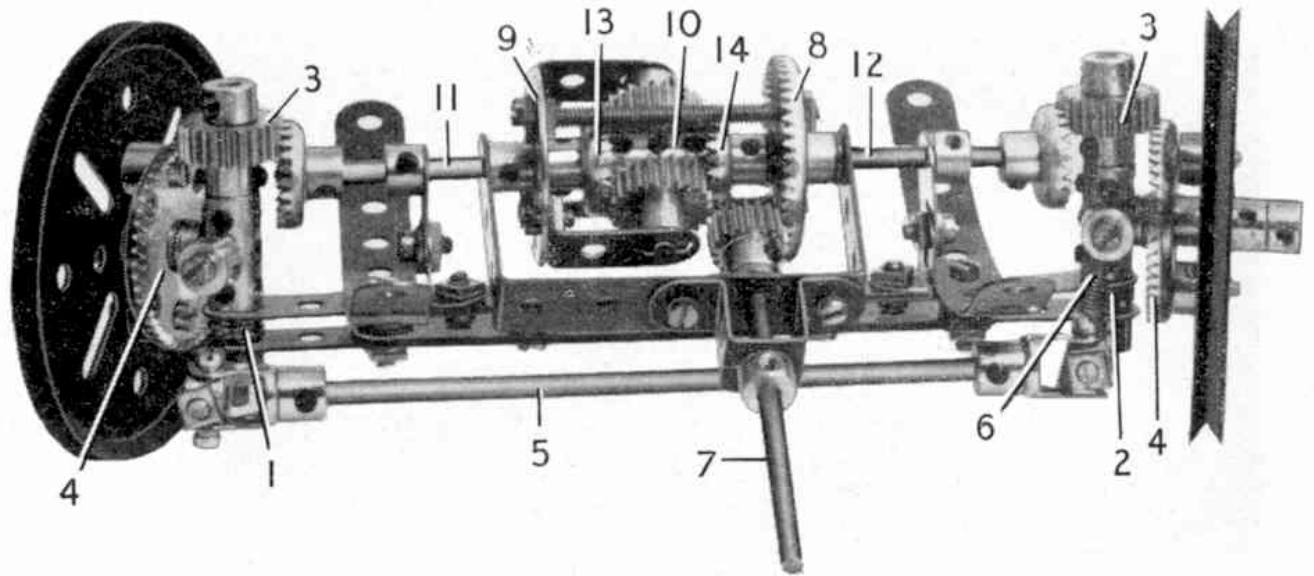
A neat front wheel drive mechanism that can be built into suitable model motor vehicles.
